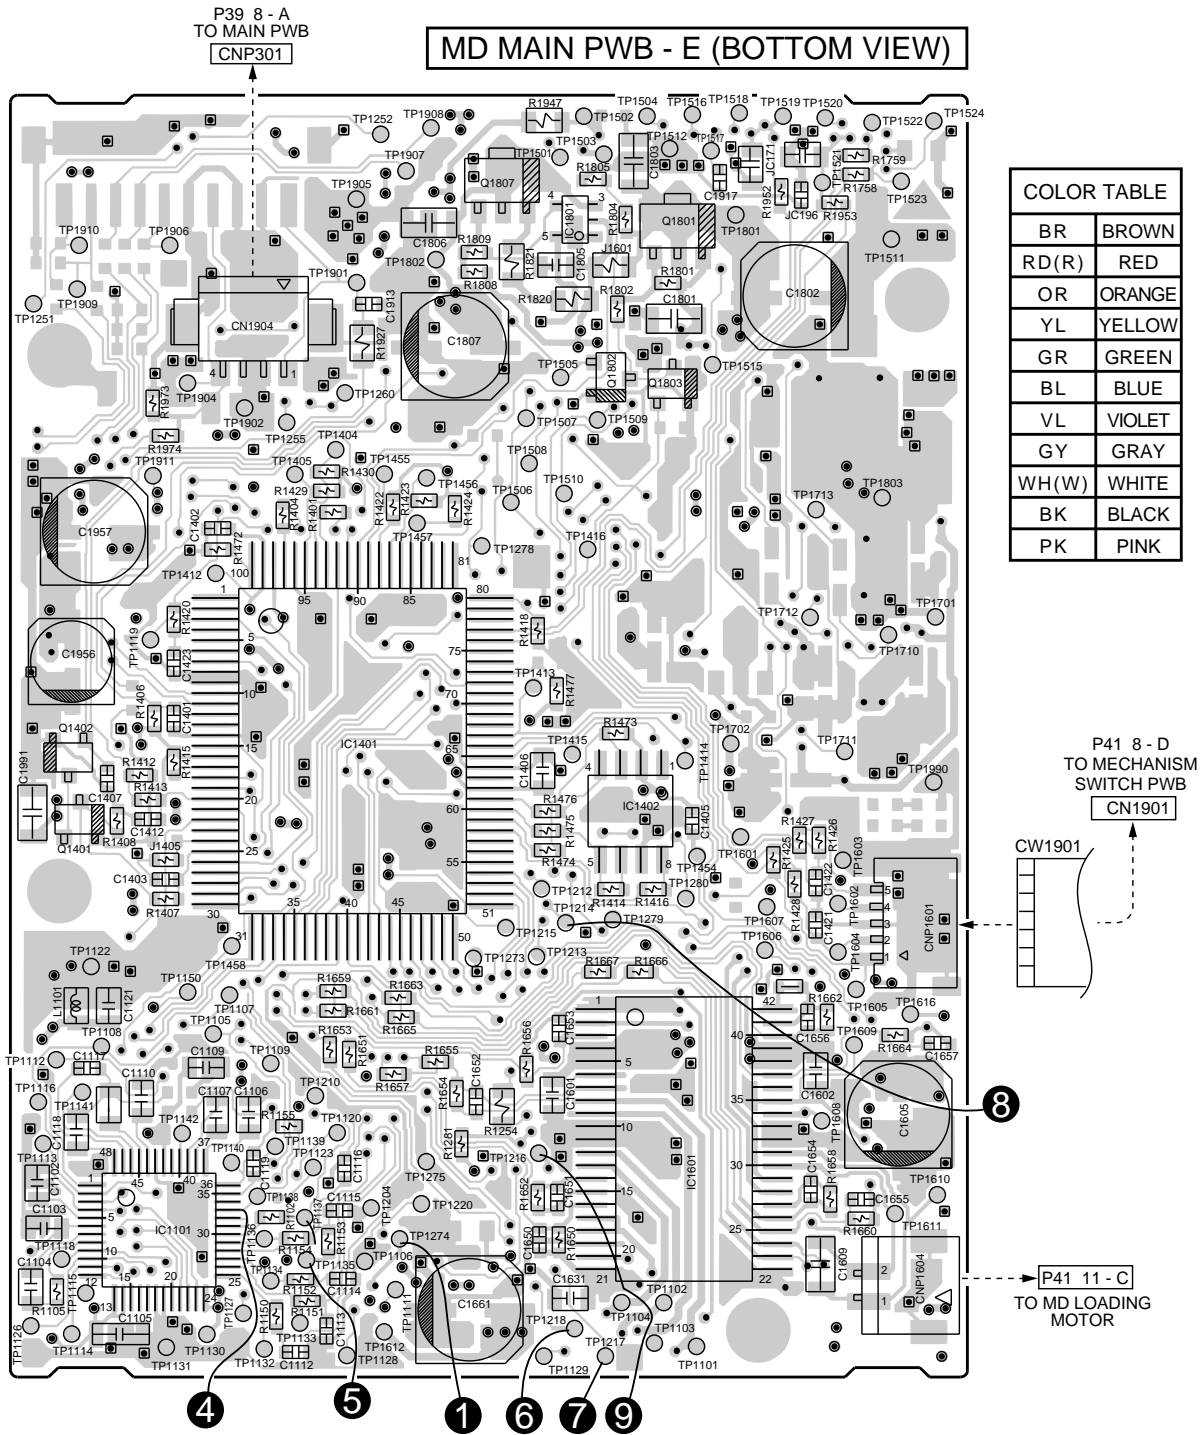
WIRING SIDE OF P.W.BOARD (2/6)
